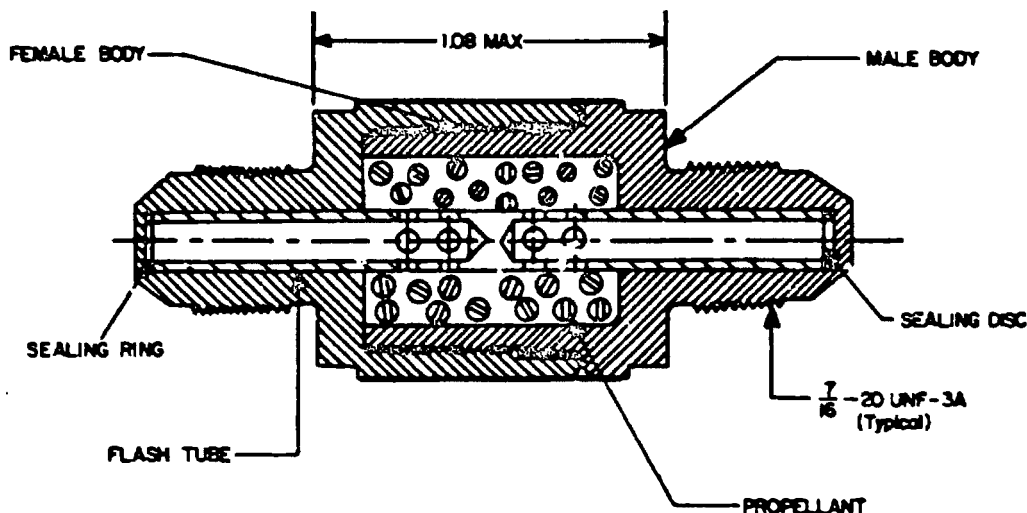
Initiator, Propellant Actuated, M104 Assembly
